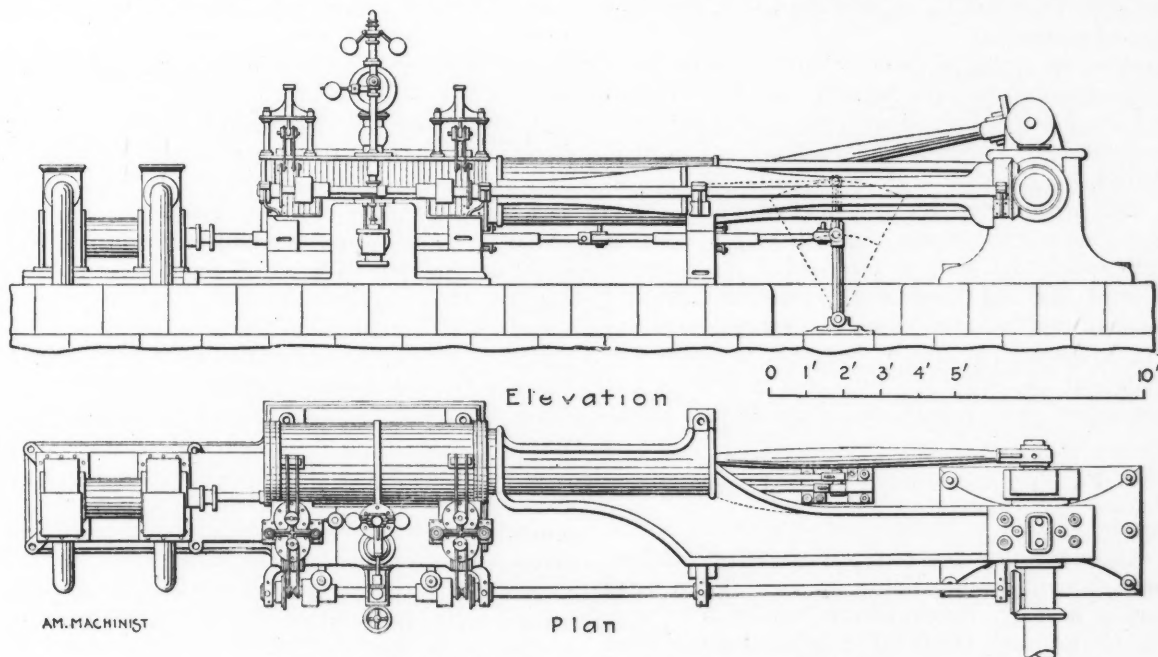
TYPE OF ENGINE USED IN PUMPING PLANT
